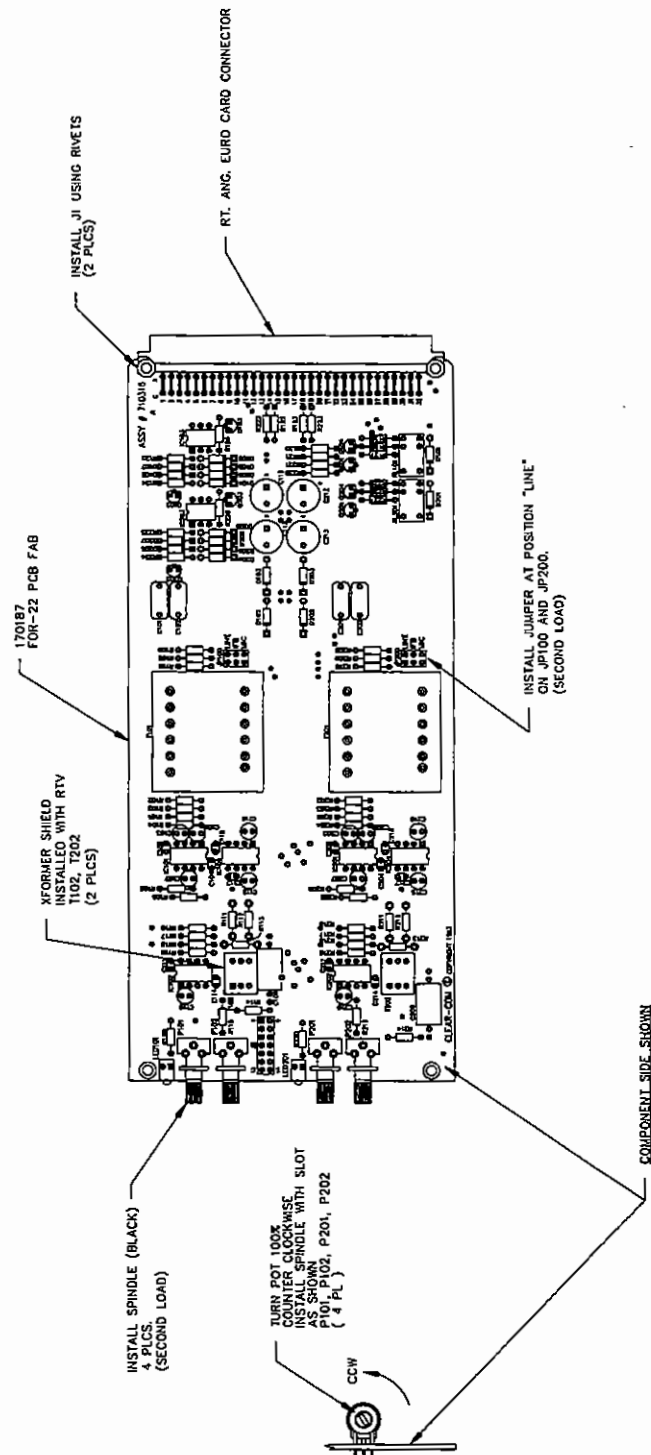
Assembly Drawing - FOR-22 Main PCB, Rev. A
